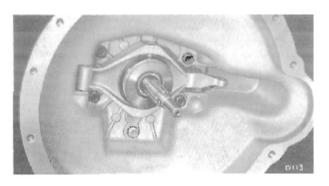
Clutch release bearing and operating lever (Herald 1200, 12/50 and Spitfire)
